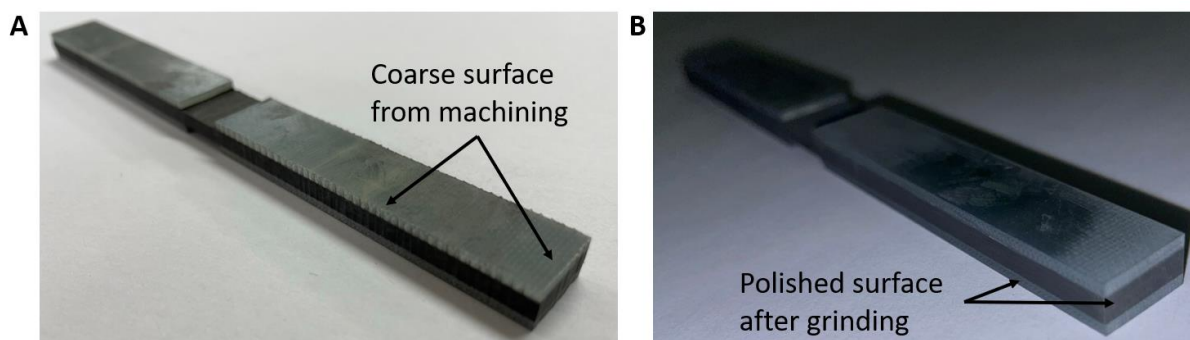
Edge finish of the specimen (A) after machining, and (B) after grinding.
